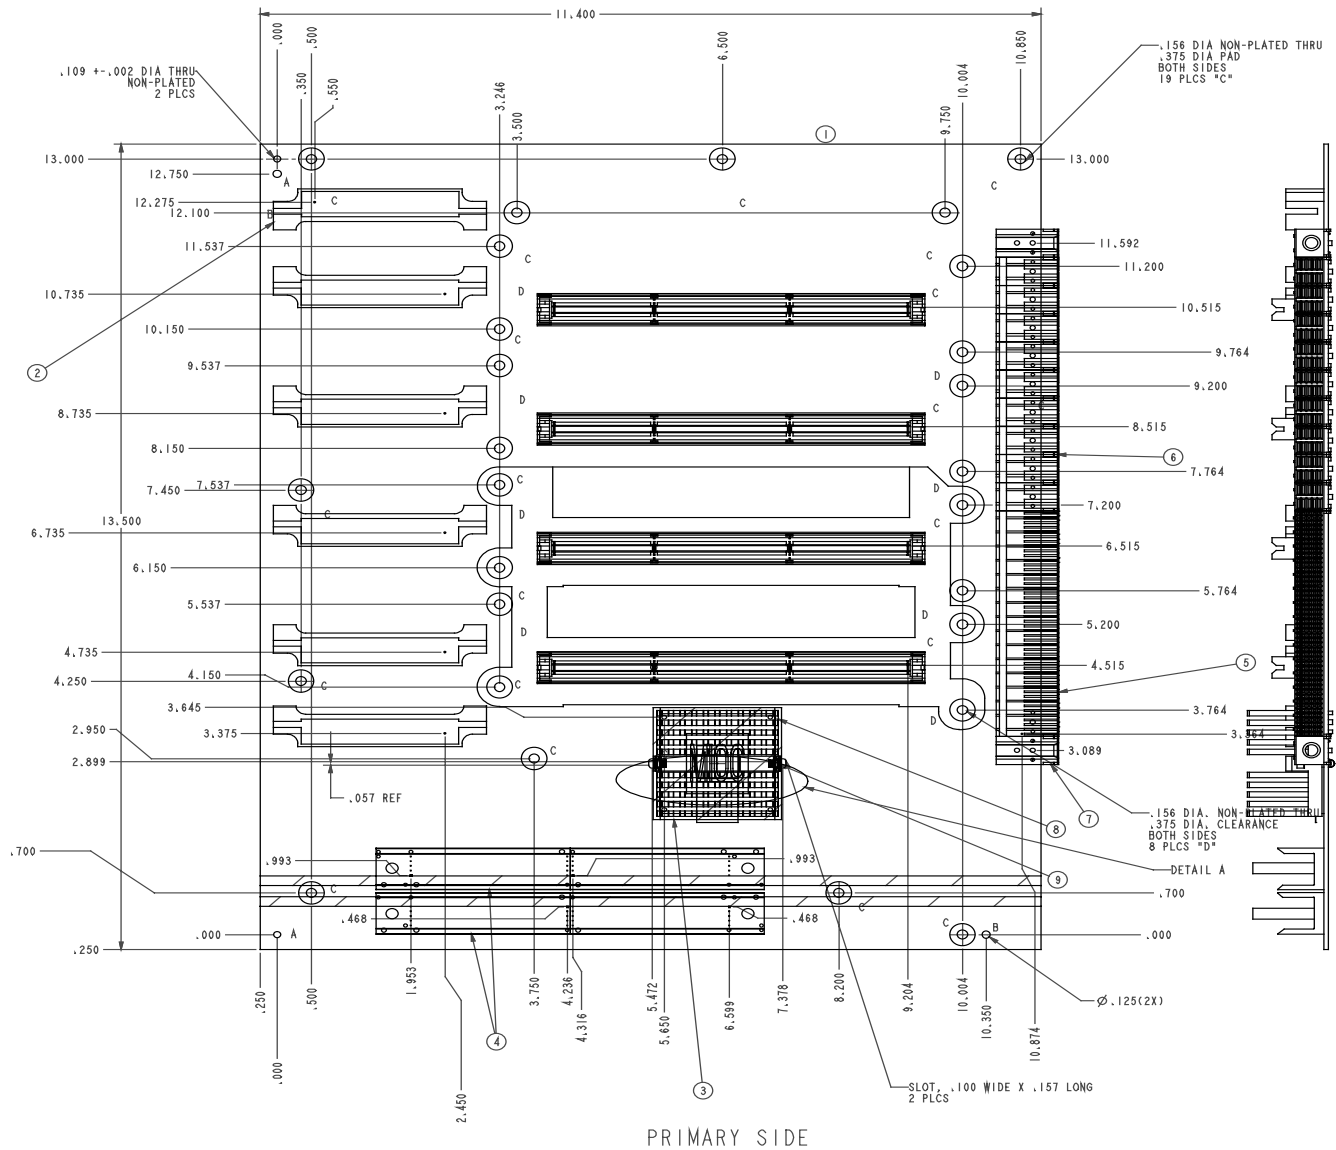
4-slot CPU Baseboard Mechanical Drawing
